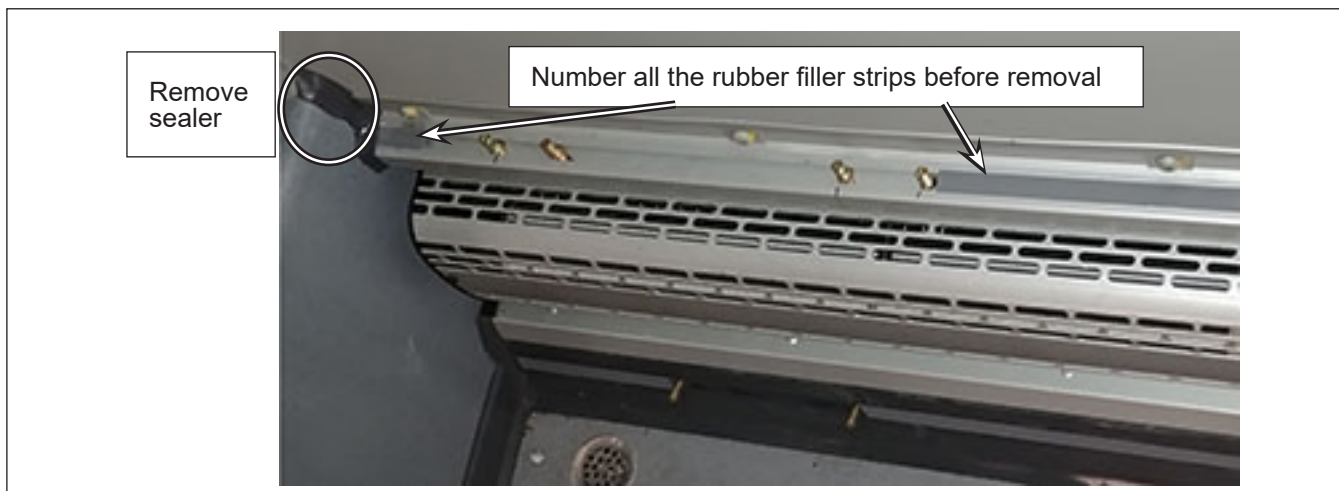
Typical Anchor Rail, Rubber Filler Strips and Sealer
